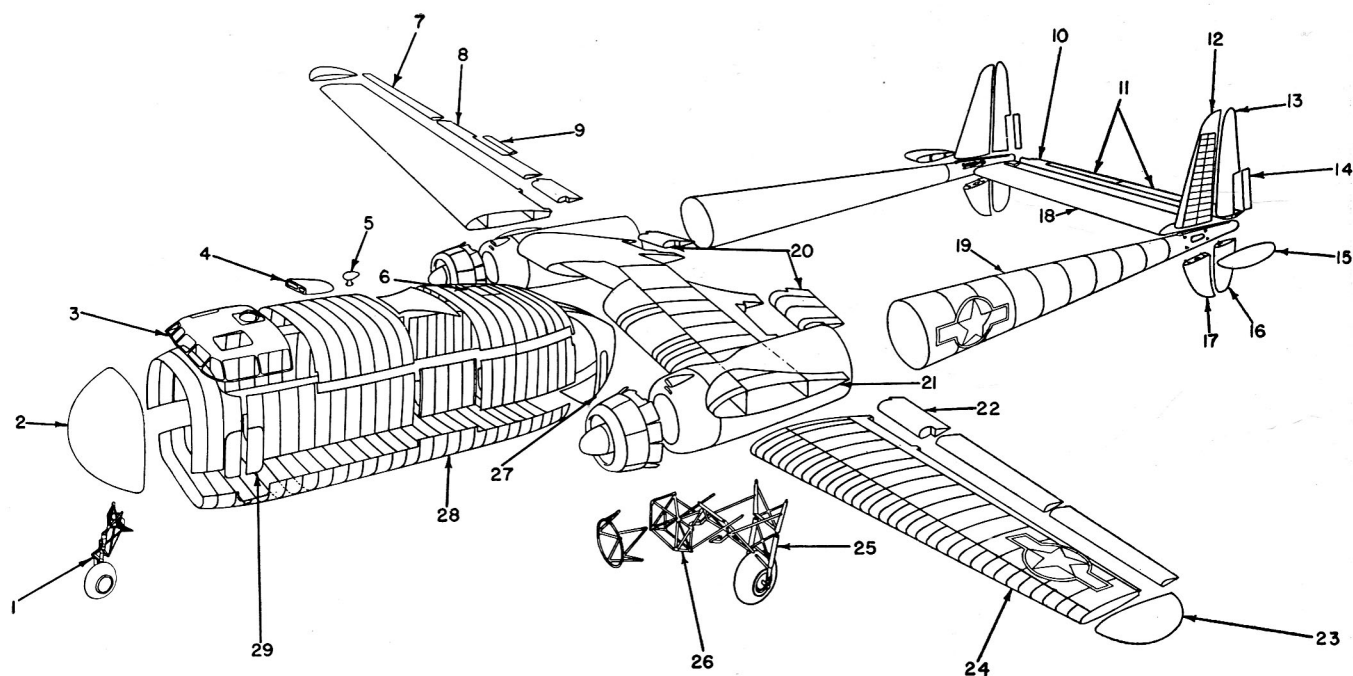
Exploded view of C-82 showing: (1) nose gear; (2) nose section; (3) cockpit enclosure; (4) scoop; (5) antenna; (6) life-raft door; (7) outboard aileron; (8) inboard aileron; (9) tab; (10) elevator; (11) tabs (spring and trim); (12) upper fin; (13) upper rudder; (14) tab; (15) stabilizer tip; (16) lower rudder; (17) lower fin; (18) stabilizer; (19) boom; (20) inboard flaps; (21) wing center section; (22) outboard flap; (23) wing tip; (24) outer panel; (25) main landing gear; (26) nacelle structure; (27) rear cargo door; (28) fuselage main body section; (29) front cargo door located below cockpit floor.
